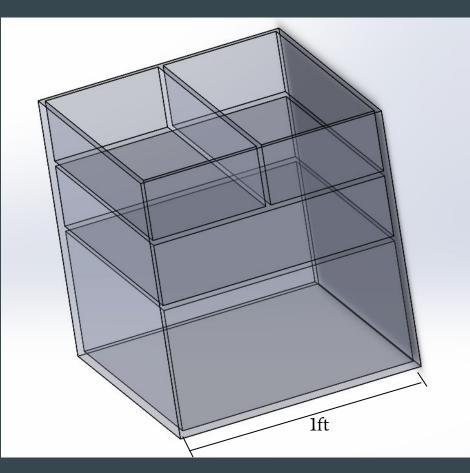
Cultivation Enclosure Design Concept CAD Drawing
